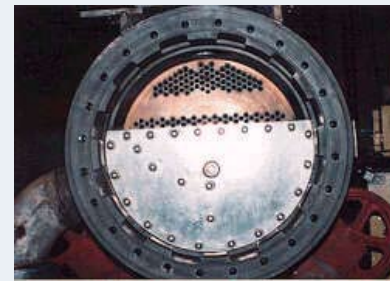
Inspecting heat exchanger tube sheet and end plate for leaks
